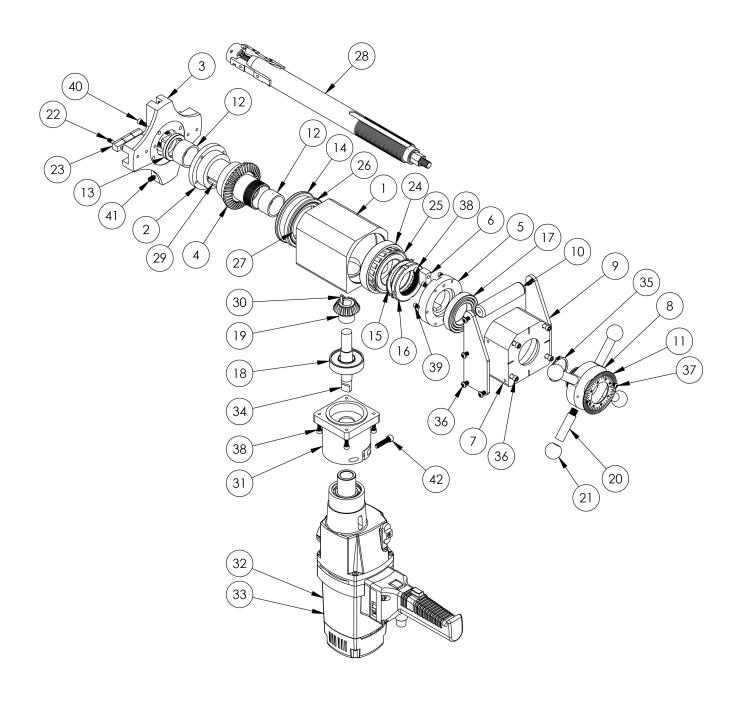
PB6 POWER BEVELER, ELECTRIC ASSEMBLY (P/N PB06EL)
